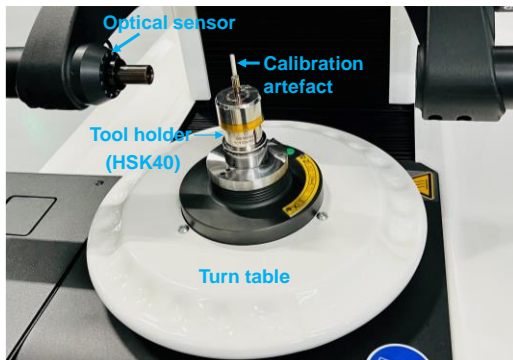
Experimental arrangement for the camera-based tool pre-setting optical sensor for off-machine measurement.
